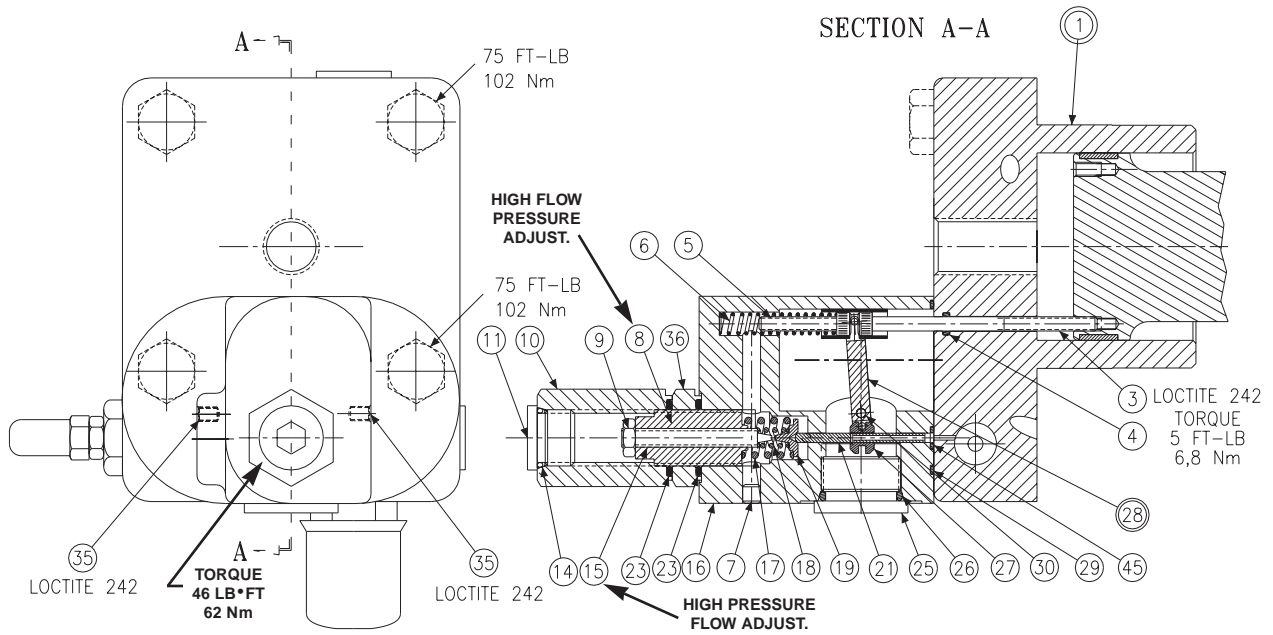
TORQUE LIMITER ASSEMBLY
